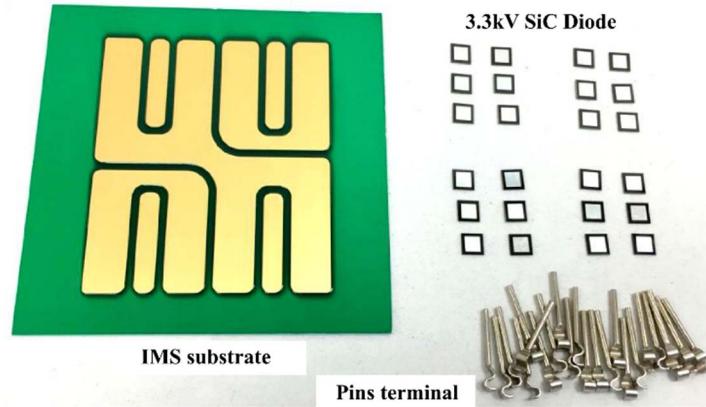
Parts used for the assembling process: IMS, SiC Diode and Pins Terminal
